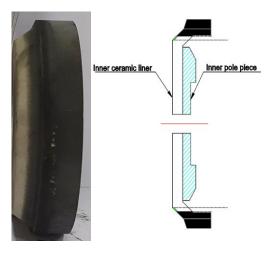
Inner Ceramic Ring after 25 hours of testing(Left), Drawing of the inner liner with Inner pole piece(Right)
